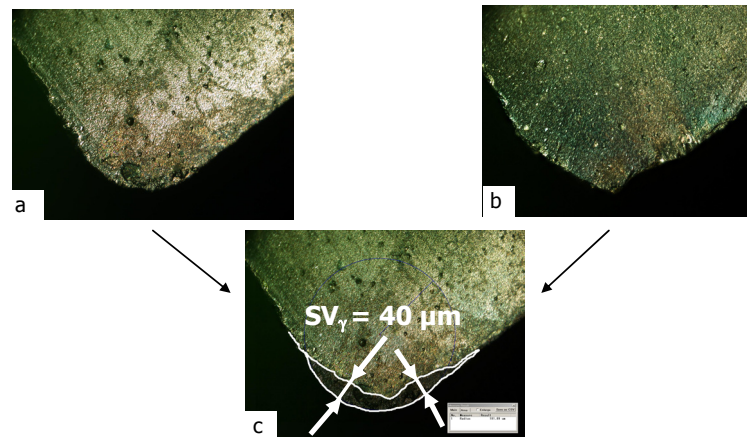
a) new cutting tool; b) worn tool; and c) tool corner wear
